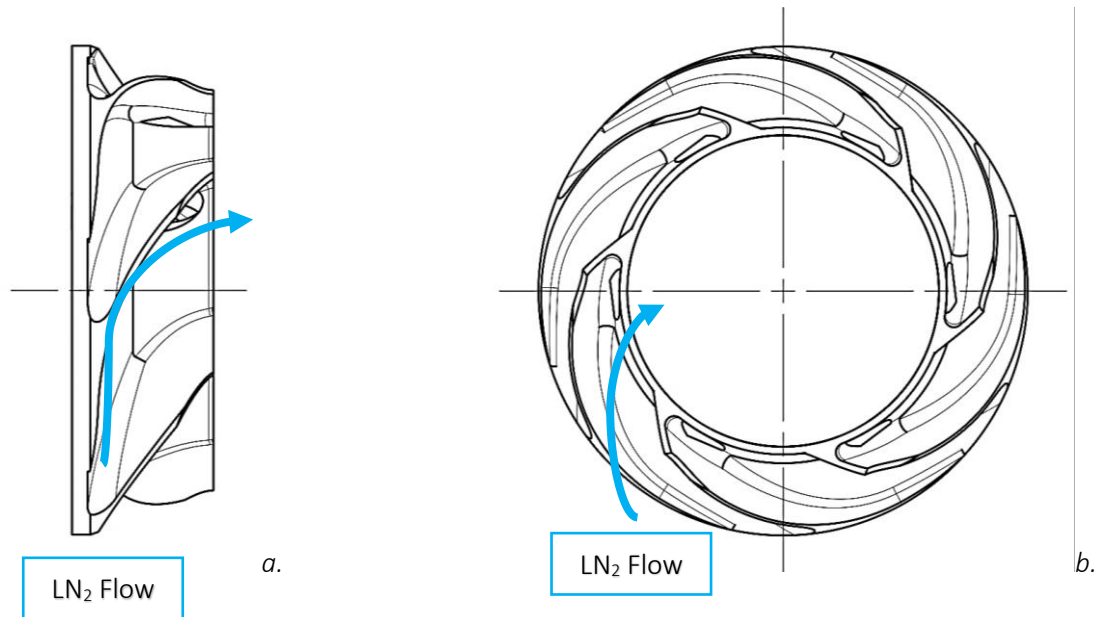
Design of axial impeller a.) side view b.) plan view
